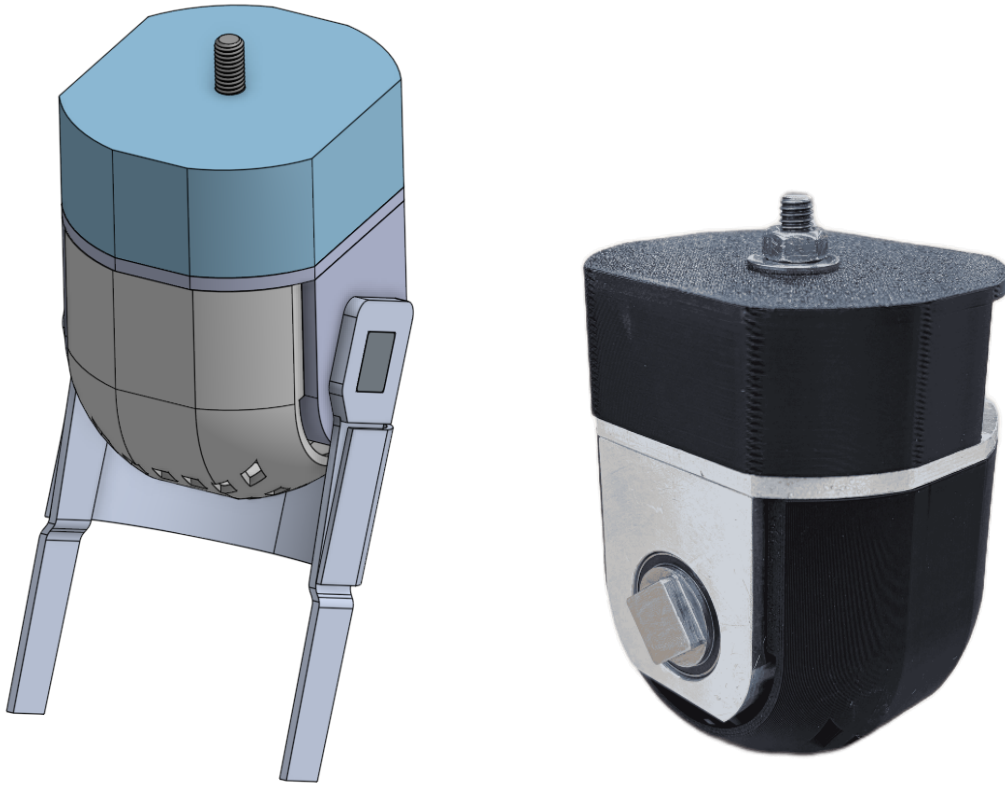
Complete elbow assemblies. On the left is the full assembly as designed in CAD. On the right is the manufactured and assembled elbow joint.
